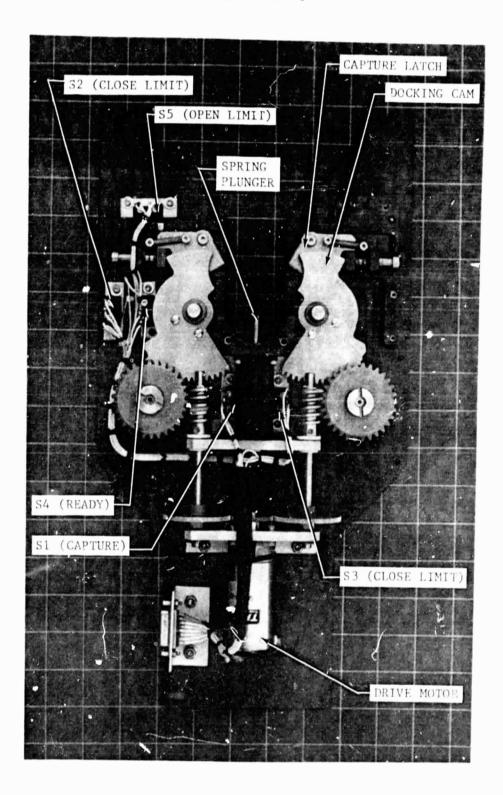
Final Configuration of Docking Device shown with Cover Removed
